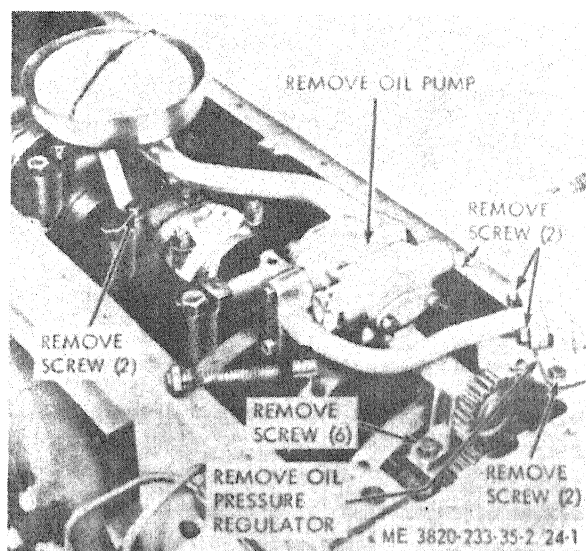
Oil pump and pressure regulator assembly, removal and installation.
